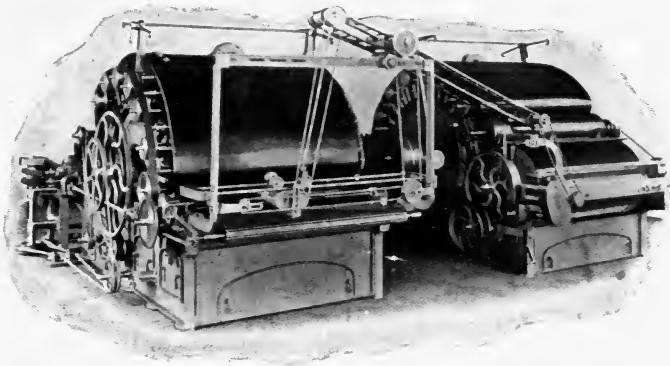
Breaker and Finisher Cards Combined by Scotch Feed.
